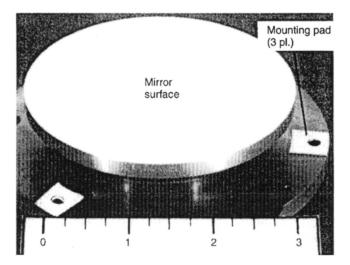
A metal mirror with front mounting pads created in the same SPDT setup as used for machining the optical surface. This maximizes alignment accuracy of the mounting surfaces. (From Zimmerman.¹⁹)
